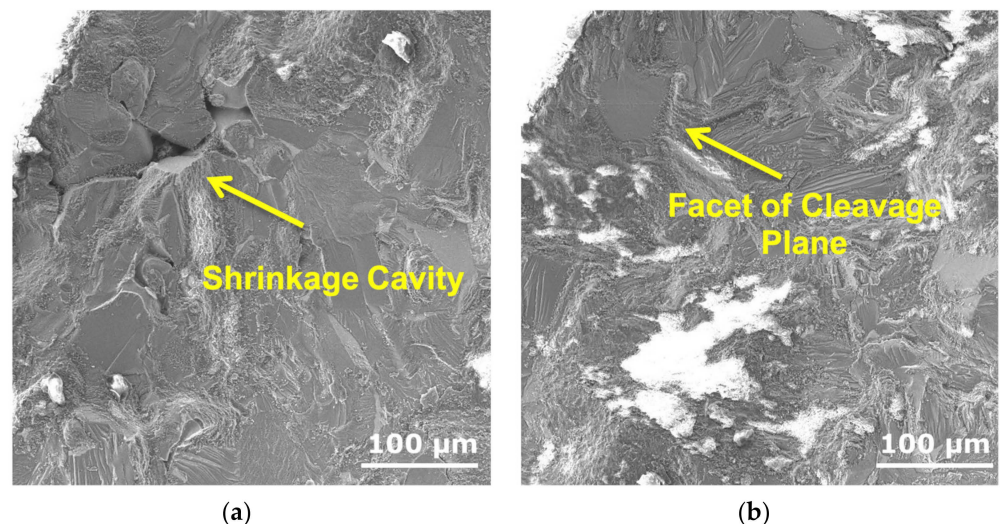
Fatigue tests (4-point rotating bending), fracture surface analysis: SEM images showing crack initiation below the ECO layer-substrate interface at a shrinkage cavity (a) and isolated facet of cleavage plane (b) in ECO-treated EV31A-T6 samples.
